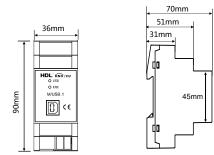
Dimensions - Front View Figure 3. Dimensions - Side View
